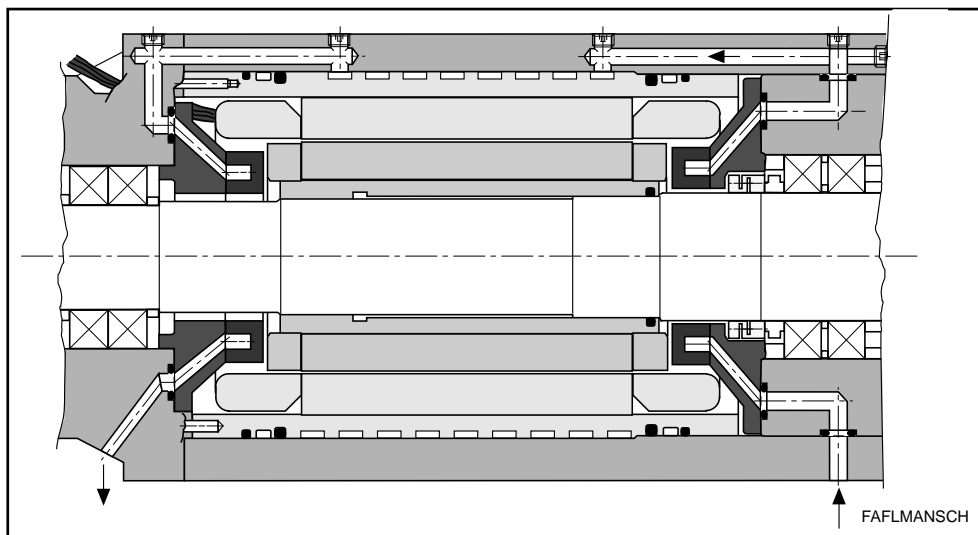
Liquid-cooled cuffs mounted close to the rotor
